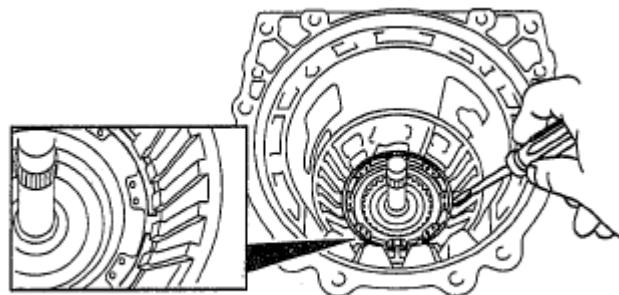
Removing Snap Ring Using Flathead Screwdriver
